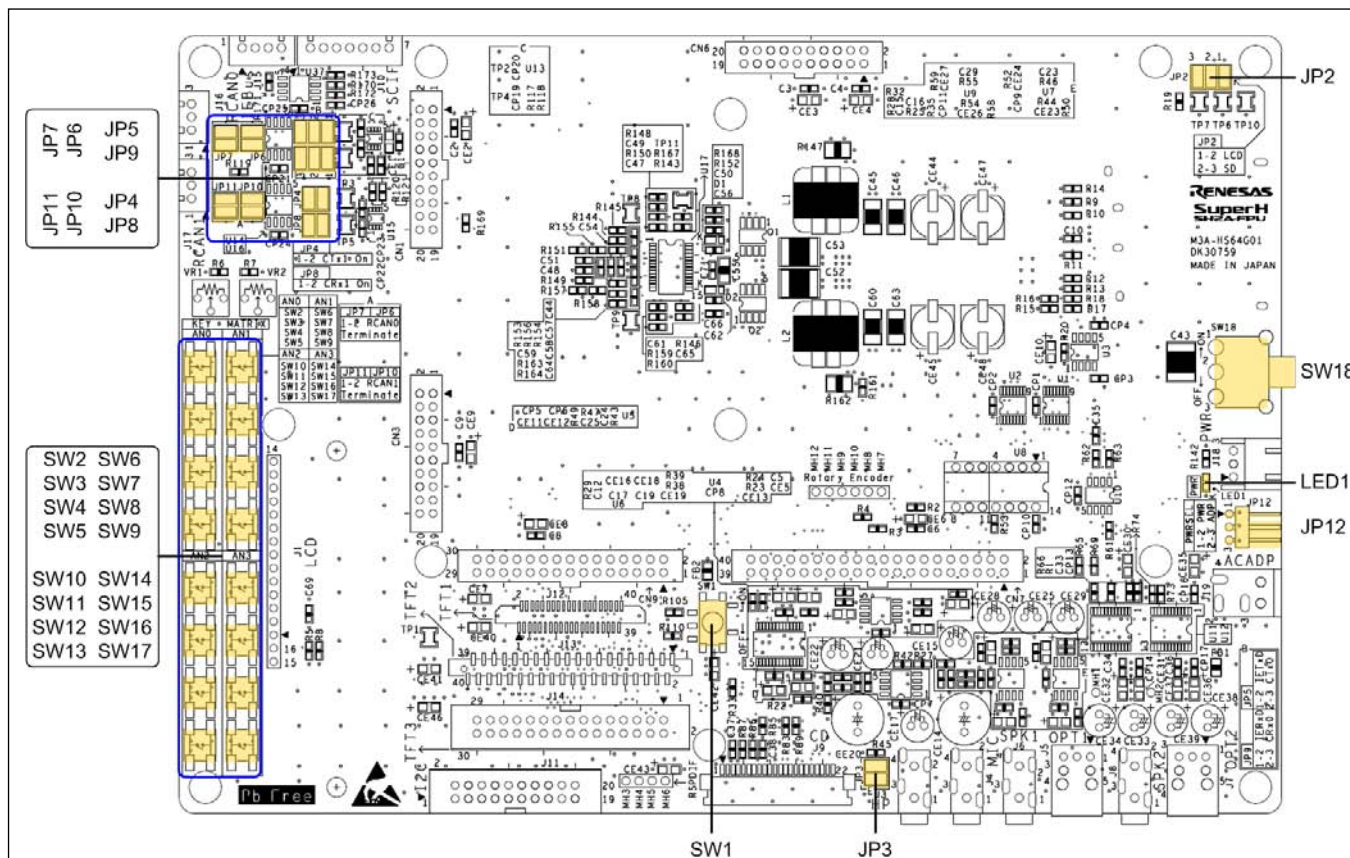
M3A-HS64G01 Operating Component Assignments (Top View of the Component Side)
